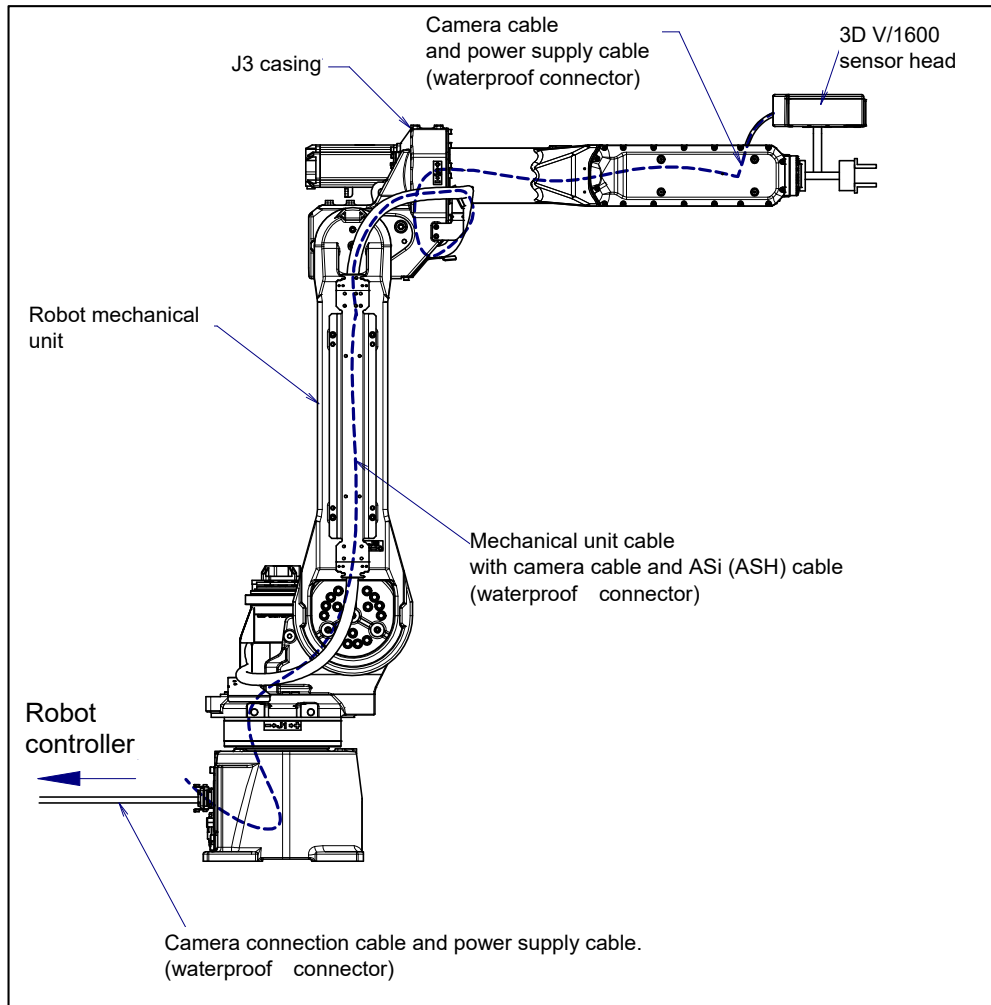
(a) Configuration of 3DV/1600 (hand camera)
